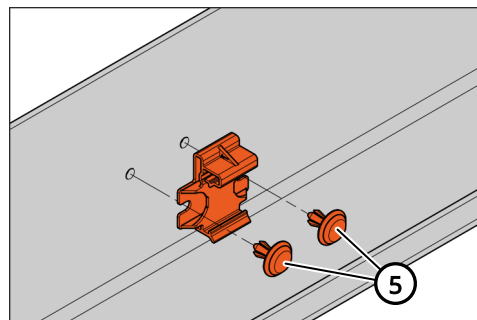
Mount the hanger clamp. The expanding rivets must be tapped in centrally and perpendicularly.
